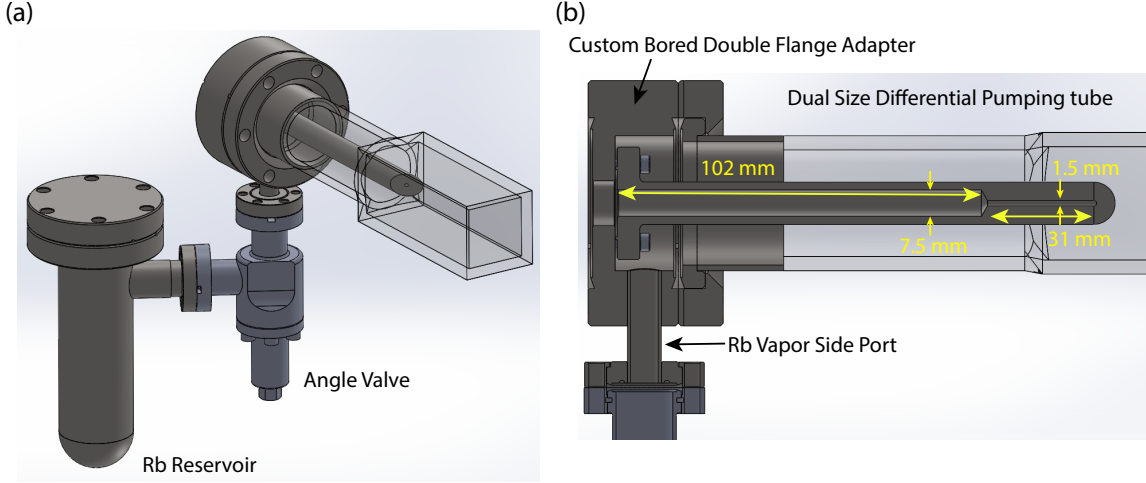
2D MOT vacuum chamber design. (a) Overview including double flange adapter, glass cell, differential pumping tube, angle valve and Rb reservoir. (b) Section view showing differential pumping tube dimensions. The differential pumping tube is attached to the double flange adapter using 6 vented bolts. The mating surface is also only a small rim rather than a large flat surface to avoid capturing air pockets with the mated surfaces that could lead to virtual leaks.
